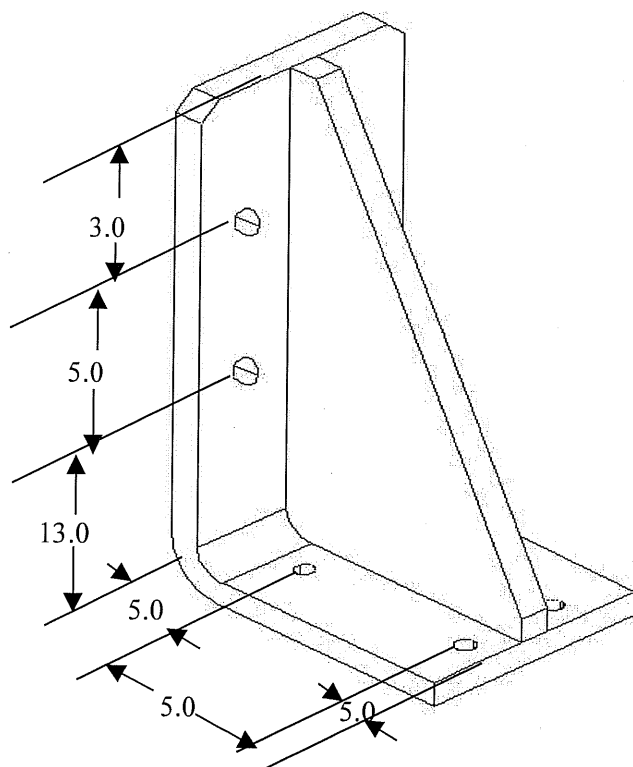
Sketch of Bumper Bracket (See drawing 25I166 for details.)
